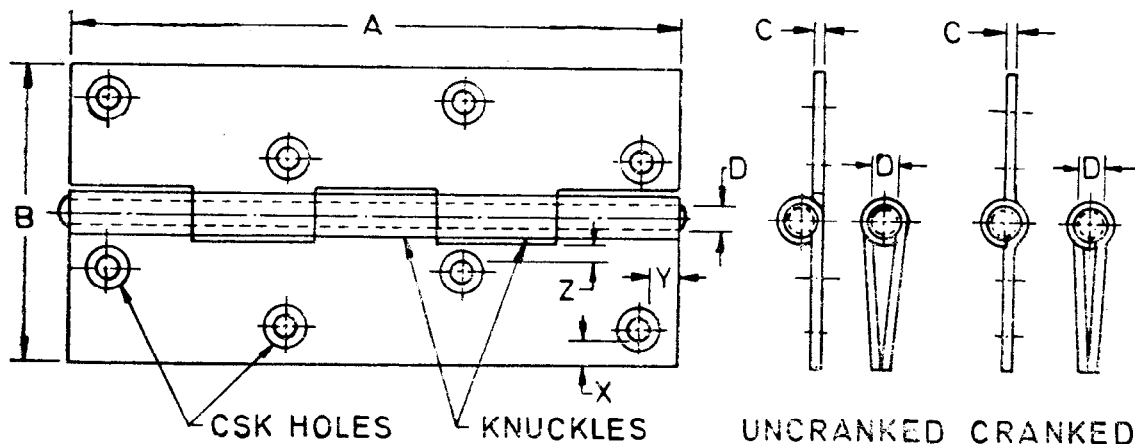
A TYPICAL MILD STEEL BUTT HINGE
